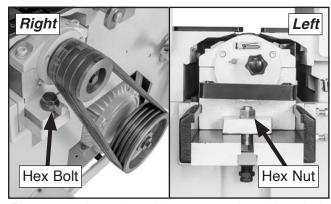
Location of lower cutterhead hex bolt and hex nut.
